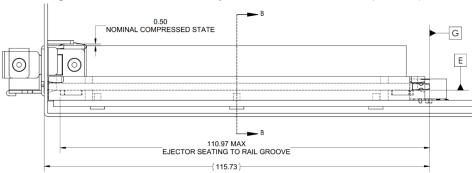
SFF Baseboard Chassis CTF Dimensions (Rear Rail Guide View)
